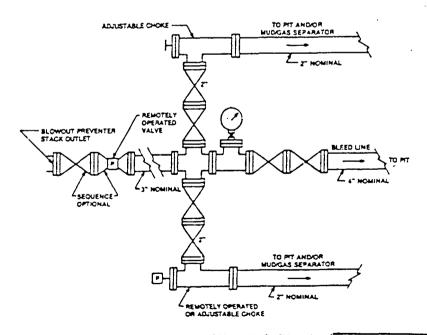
Typical choke manifold assembly for 5M rated worl pressure service — surface installation.
